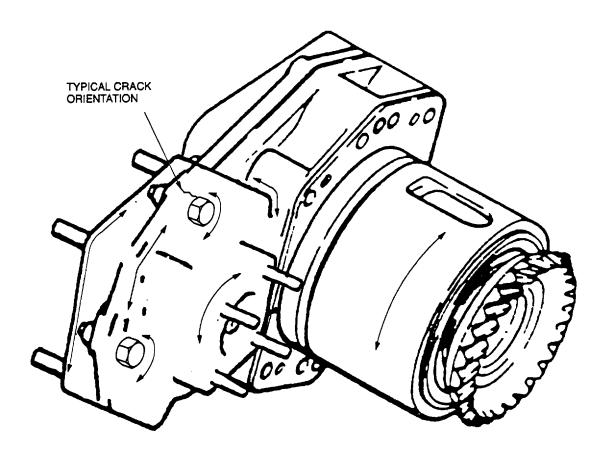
Hydraulic Pump and Tachometer Quill Case
